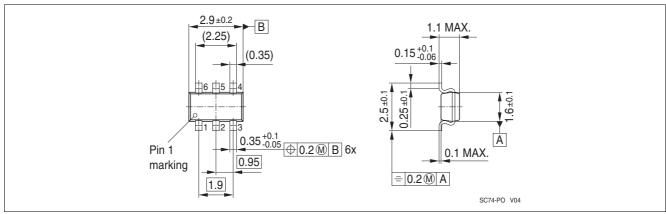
Package Outline for SC74 (dimensions in mm)
